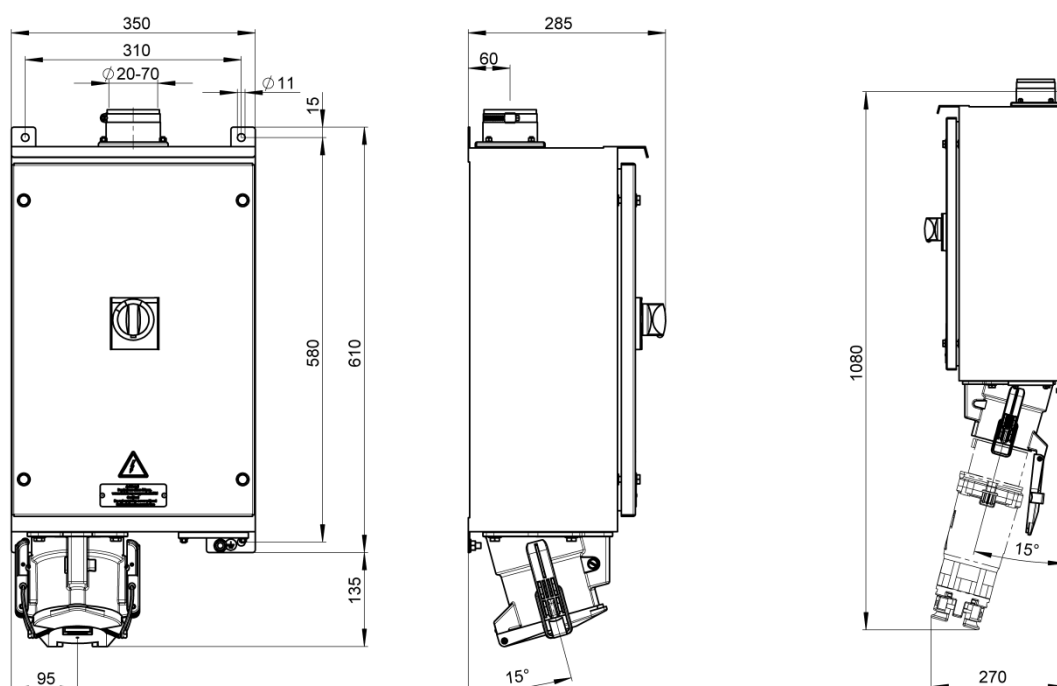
Dimensions, Connector Unit with Circuit Breaker CUCB C-Line (200A – 250 A) in mm
